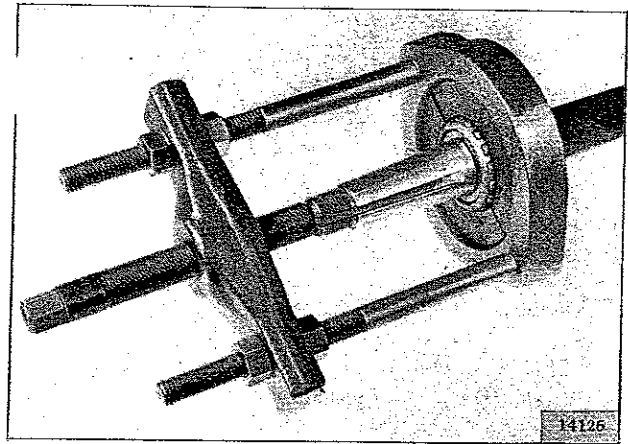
REMOVING AXLE SHAFT BEARING—
